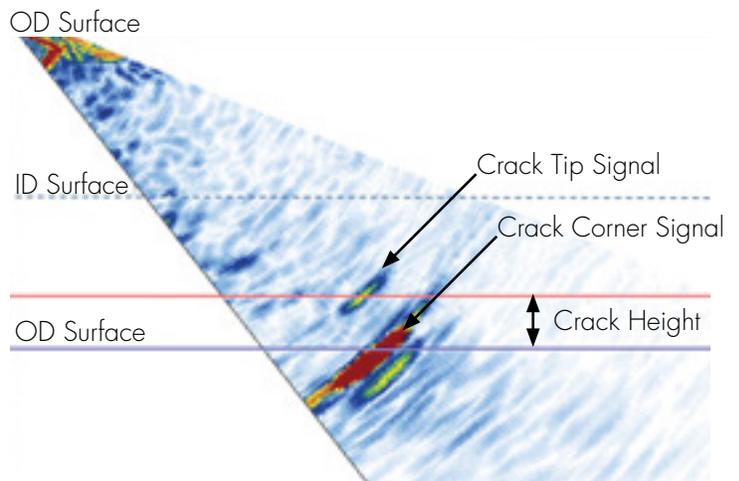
PAUT Through Wall Sizing using Crack Tip Diffraction
